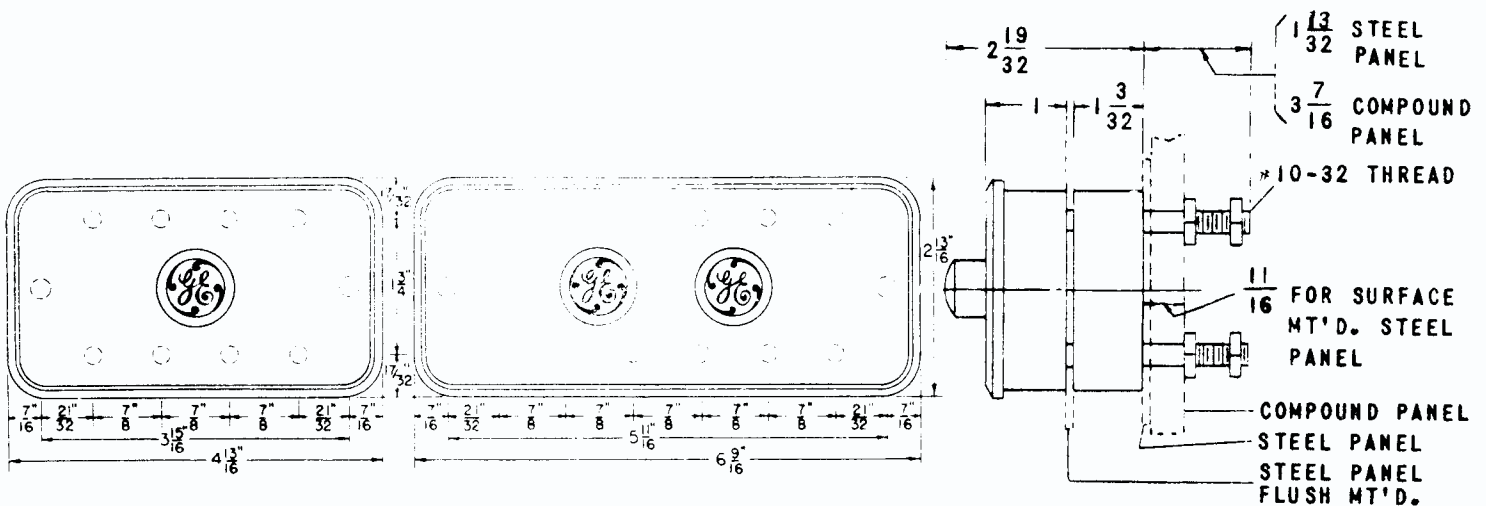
(8918488B) Outline Dimensions of Four-pole and Six-pole Test Blocks
